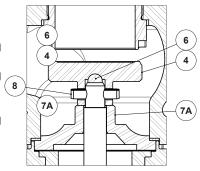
Detail A 2" and 21/2" – DN 50 and DN 65
